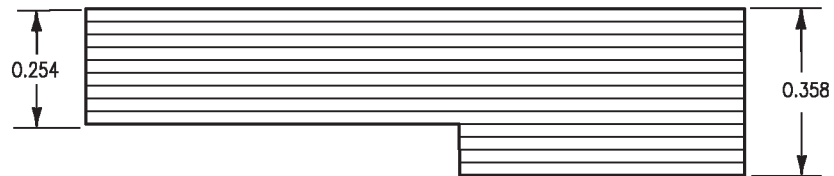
Typical Thickness for Lower Inboard Skin Assembly, 74A110954
